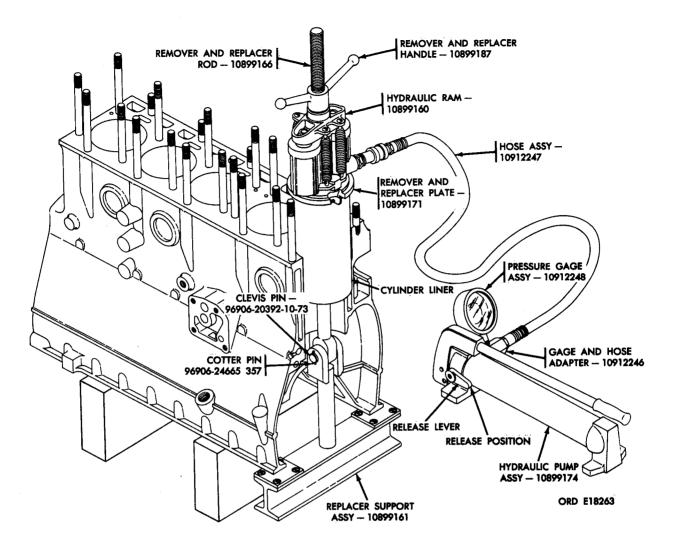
CYLINDER SLEEVE REMOVER AND REPLACER KIT - 8722925 AND RAM KIT - 10912249 SHOWING PROPER METHOD OF CYLINDER LINER INSTALLATION.
